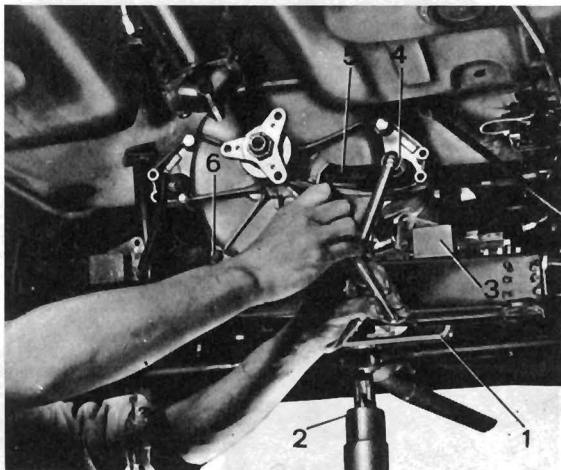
Unbolting gear selector lever (Sec 2)
